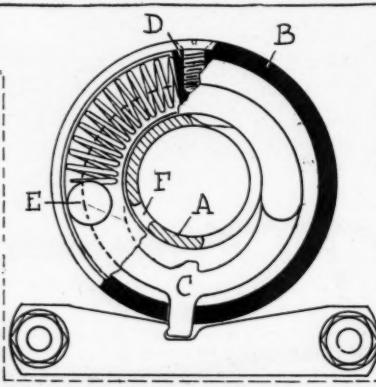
IMPULSE STARTER WITH MOTOR STOPPED, READY FOR CRANKING
